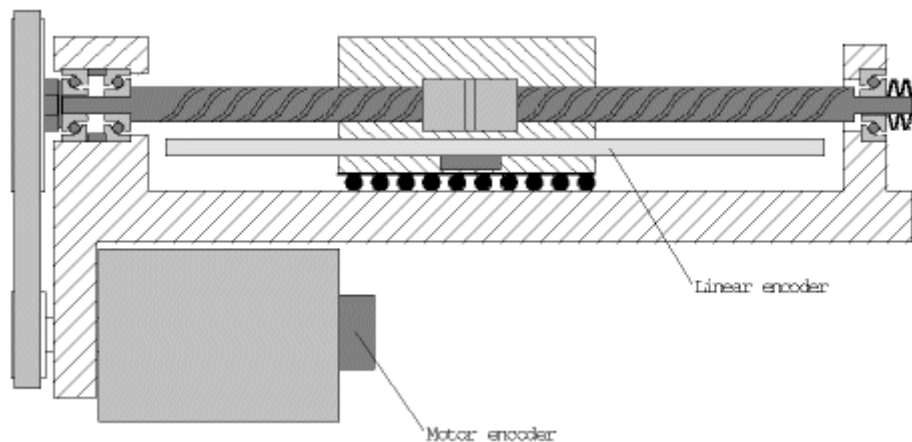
The essential elements of a typical machine tool drive* [55]
